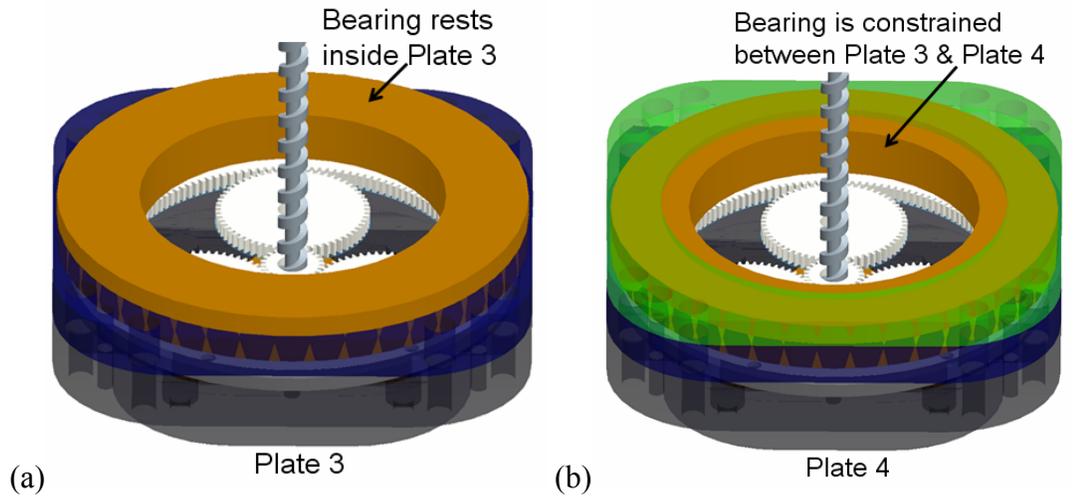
Two Delrin plates that house large bearing (a) bottom and (b) top.
